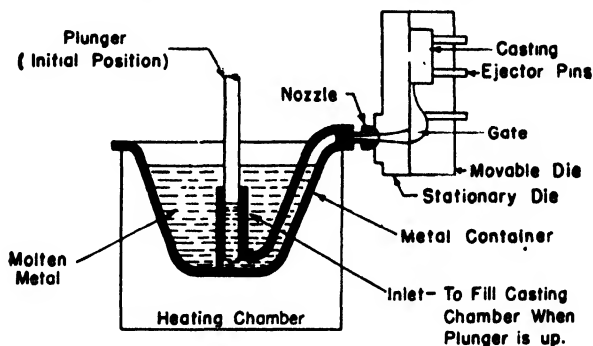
Typical piston type die casting machine. The plunger, heating chamber, metal chamber, and die carriage are parts of the same machine.
